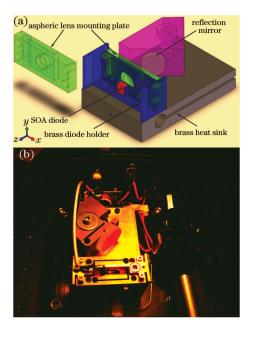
Experimental setup of SOA system. (a) Exploded mechanical design draft; (b) photograph of the optical part.
